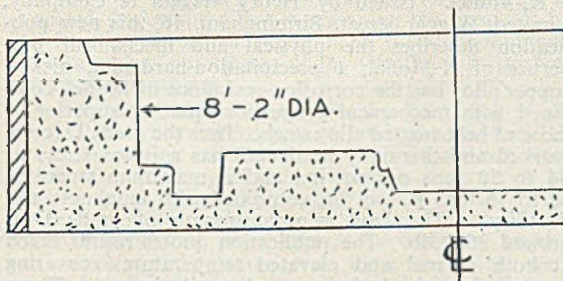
PROFILE B OF THE STRICKLE BOARD WOULD STRIKE OUT THIS SECTION OF THE MOULD.
